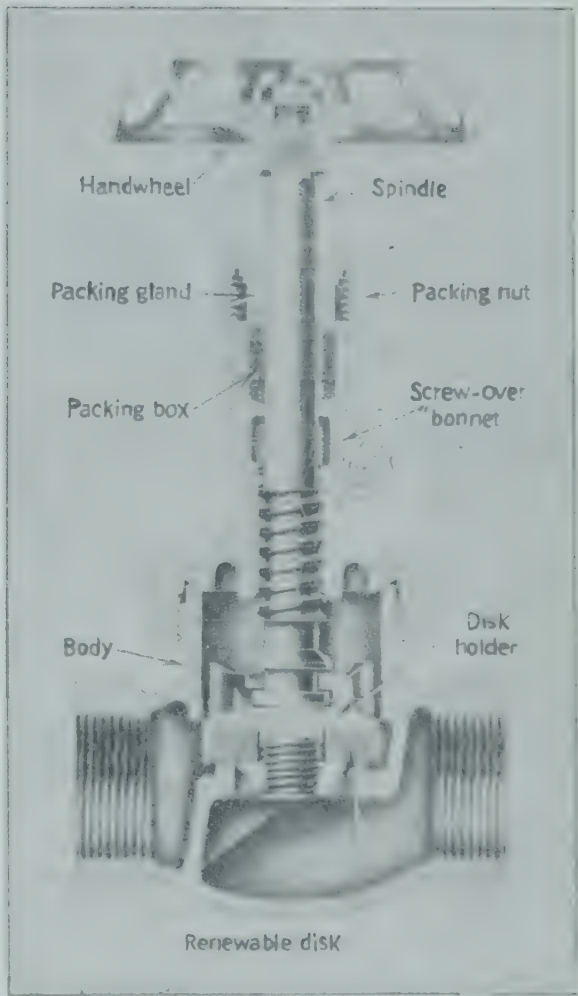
Sectional view of globe valve with rising spindle. (Jenkins Bros.)
